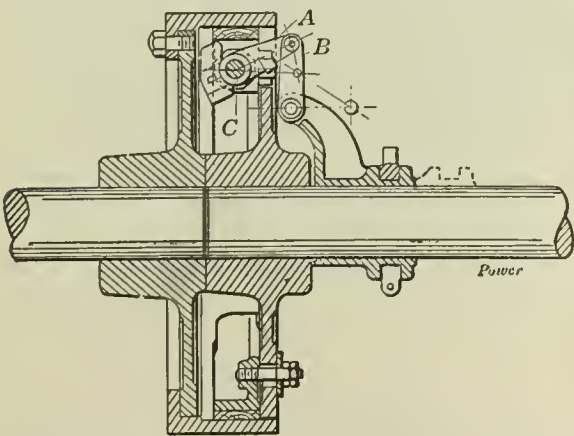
SECTION OF A. & F. BROWN FRICTION-CLUTCH PULLEY
